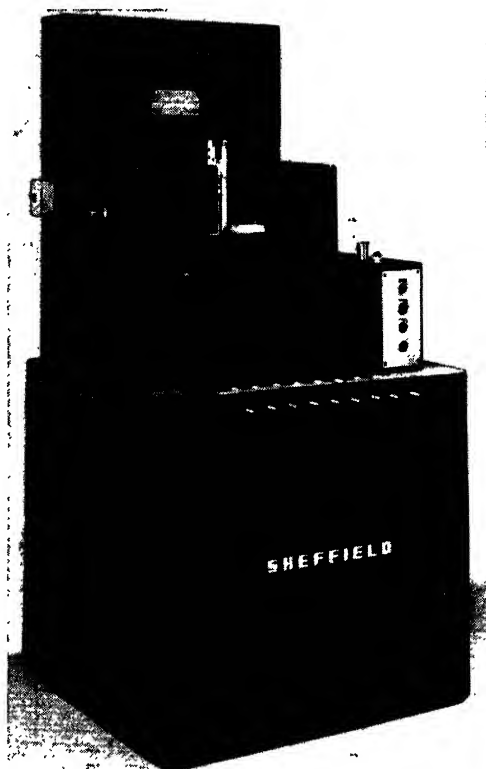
4. Automatic gaging machine for segregating refrigerating-unit valve plates into 25 classifications. (Courtesy of The Sheffield Corporation.)
